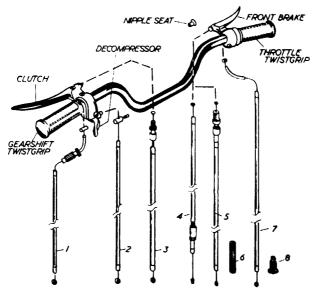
HANDLEBARS AND CABLES N AND S MODELS
